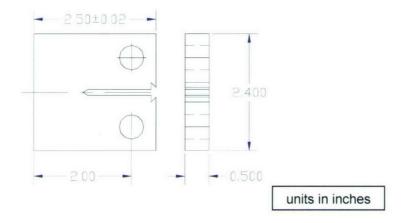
Schematic of the Compact Tension Specimen Used in Fatigue Crack Growth Rate Tests
